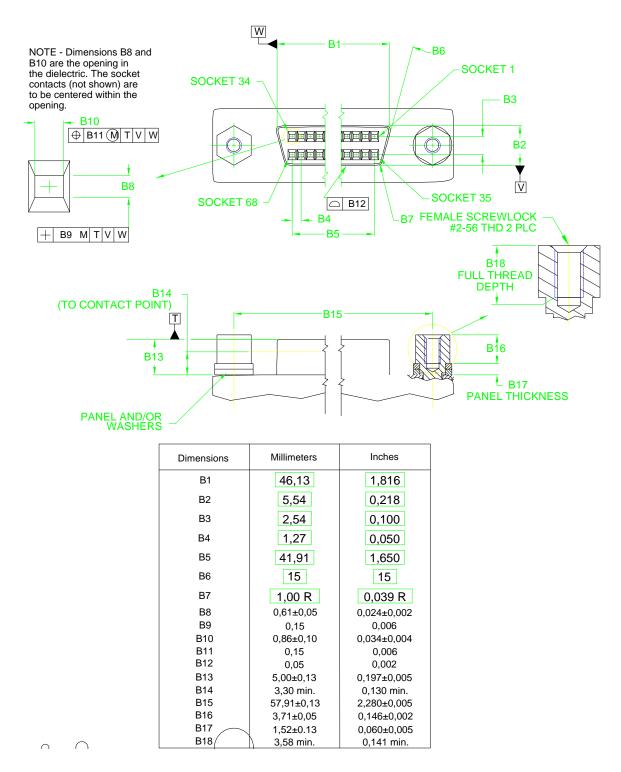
68-contact alternative 3 shielded SCSI device connector (P cable/Q cable)
